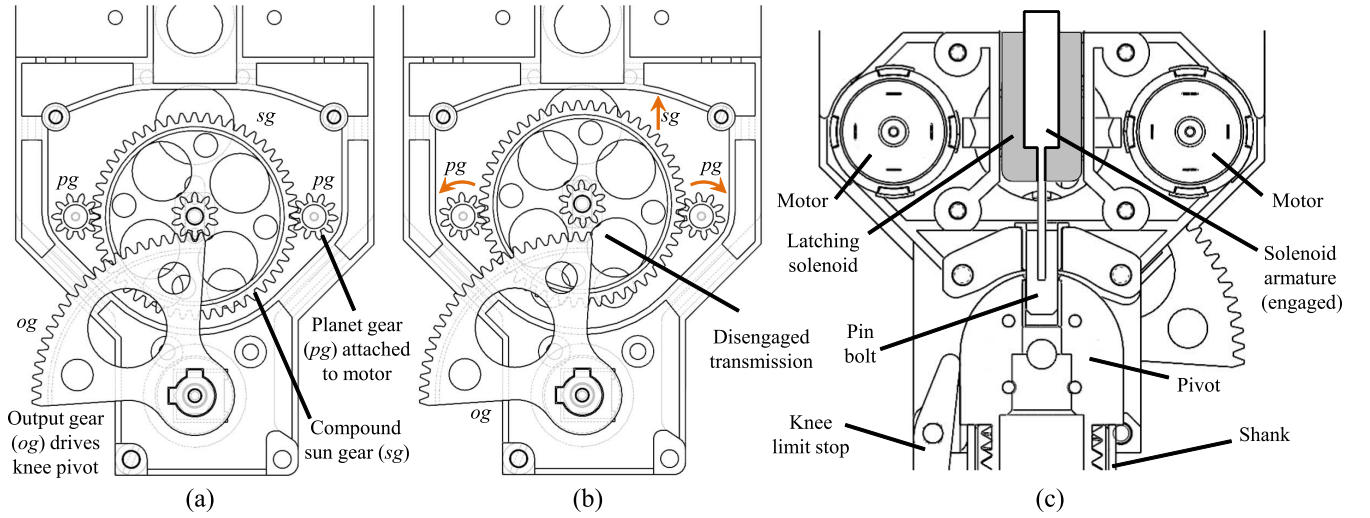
Gearbox and knee lock. a) Engaged transmission; compound sun gear (sg) is down and mating with output gear (og) of knee pivot. b) Disengaged transmission; sg is up and floats above og . c) Knee lock mechanism with pin bolt engaged, preventing the pivot from rotating. The cross section is across lower limb sagittal plane.
